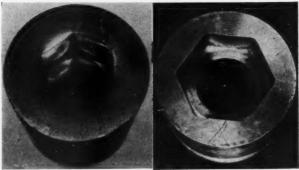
(above) Hob and cold hobbed die insert for heading hook bolts
